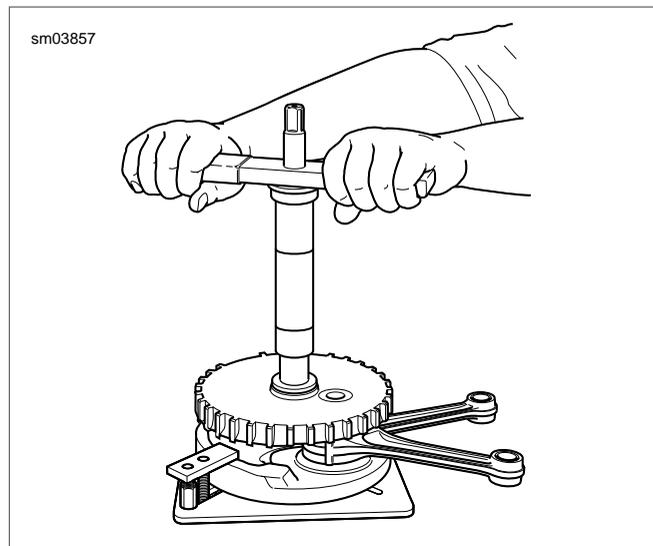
Press Inner Race onto Sprocket Shaft: Operation
